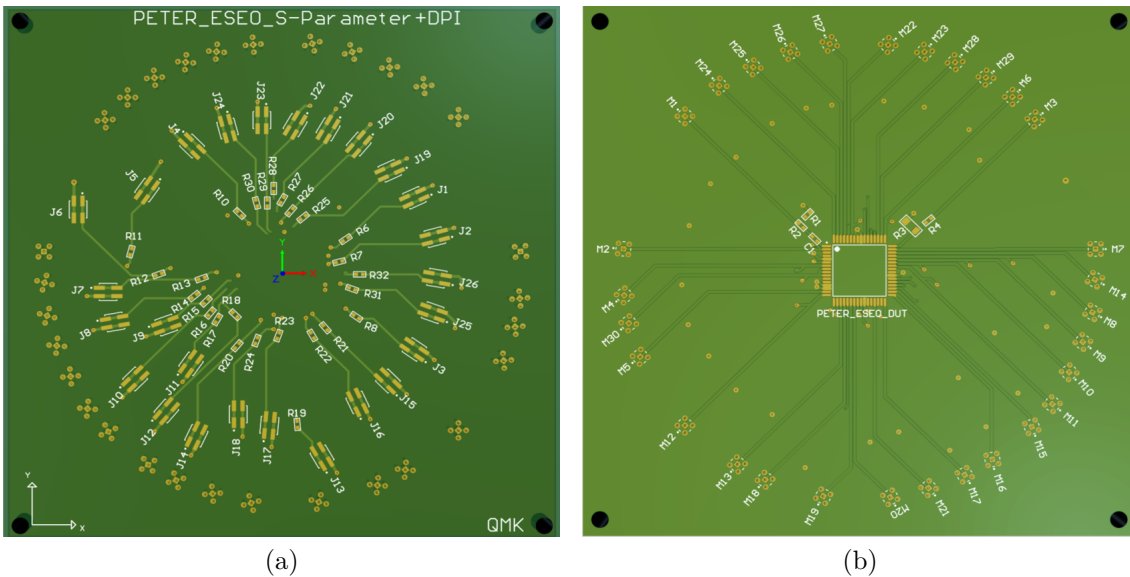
13 cm \times 13 cm 4-layer FR-4 PCB conducted immunity variant (packaged) (a) top; (b) bottom.
